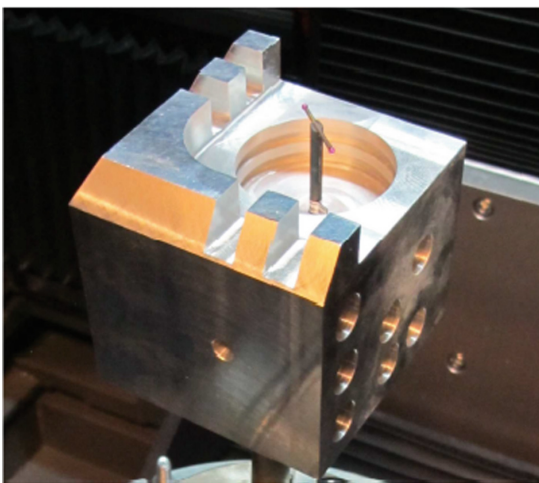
The aluminium test piece with small ball bar (size: 90 × 90 × 90 mm)
